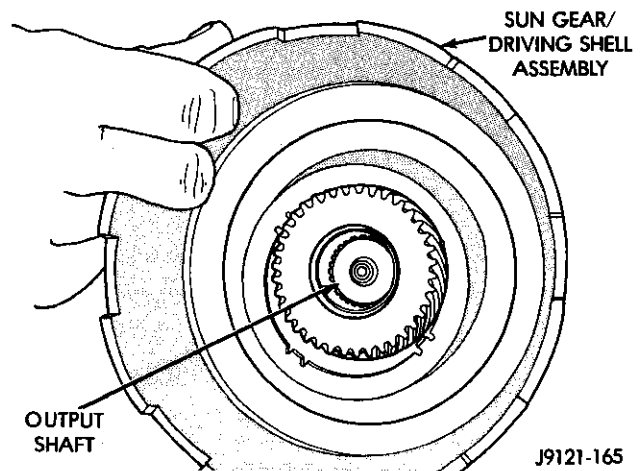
Installing Assembled Sun Gear And Driving Shell On Output Shaft
